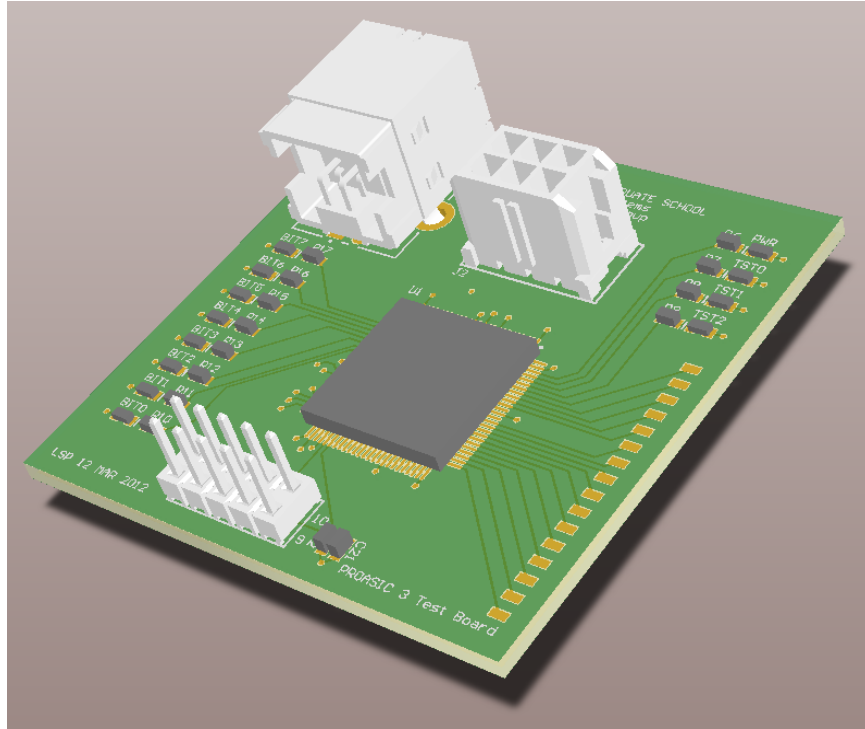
ProASIC3 Test Board 3-D isometric view with component models indicating approximate sizing and spacing of integrated board.
